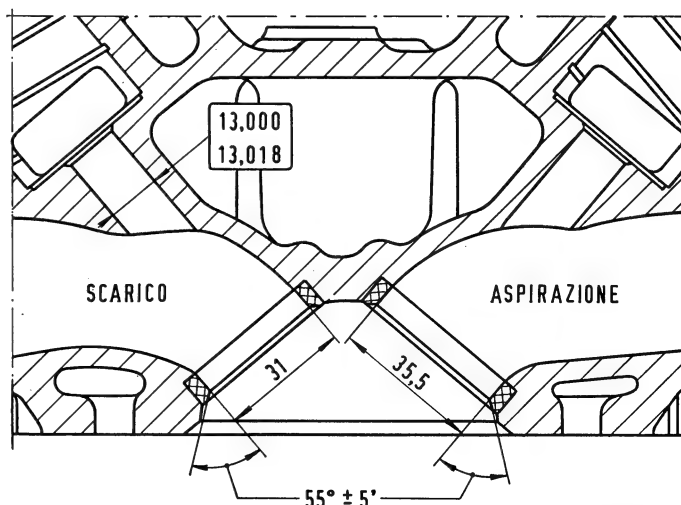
Critical dimensions (in mm) and angles of 118 B.000 engine valve seats on head.
